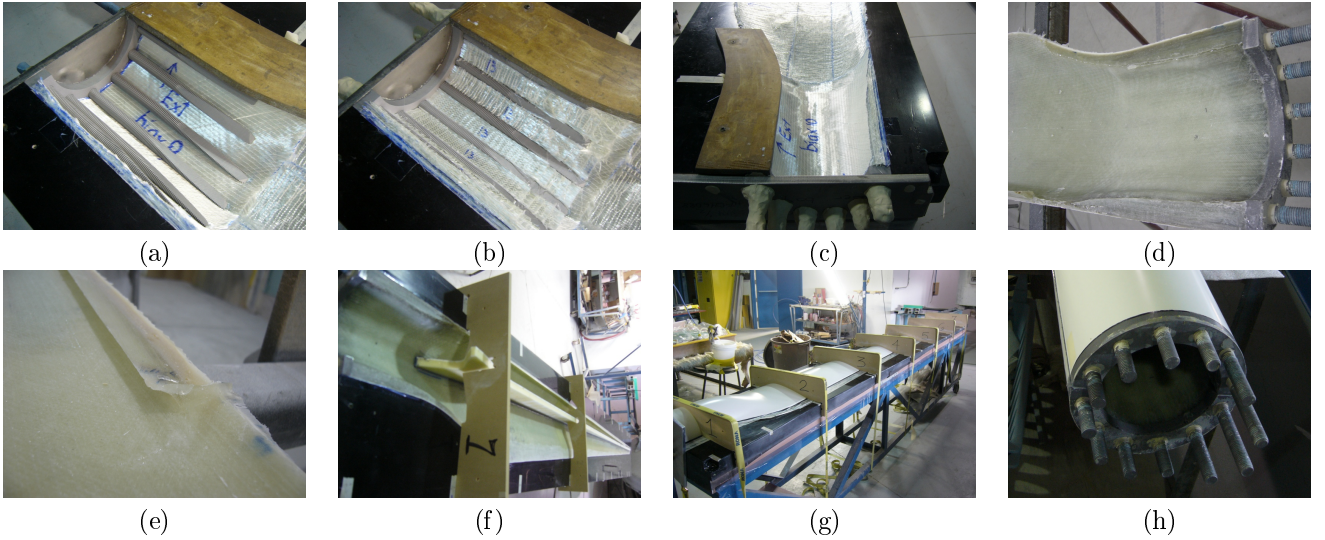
Blade manufacturing: (a–c) blade root layup; (d) infused lower surface; (e) bonding lip on lower surface's leading edge; (f) bonding of shear web on lower surface, nine positioning jigs are used (only two shown); (g) bonding of the upper surface on the lower surface and shear web assembly; (h) close view of the assembled blade root.
